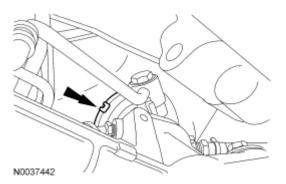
Locating Steering Gear-To-Dash Seal Clips Courtesy of FORD MOTOR CO.
